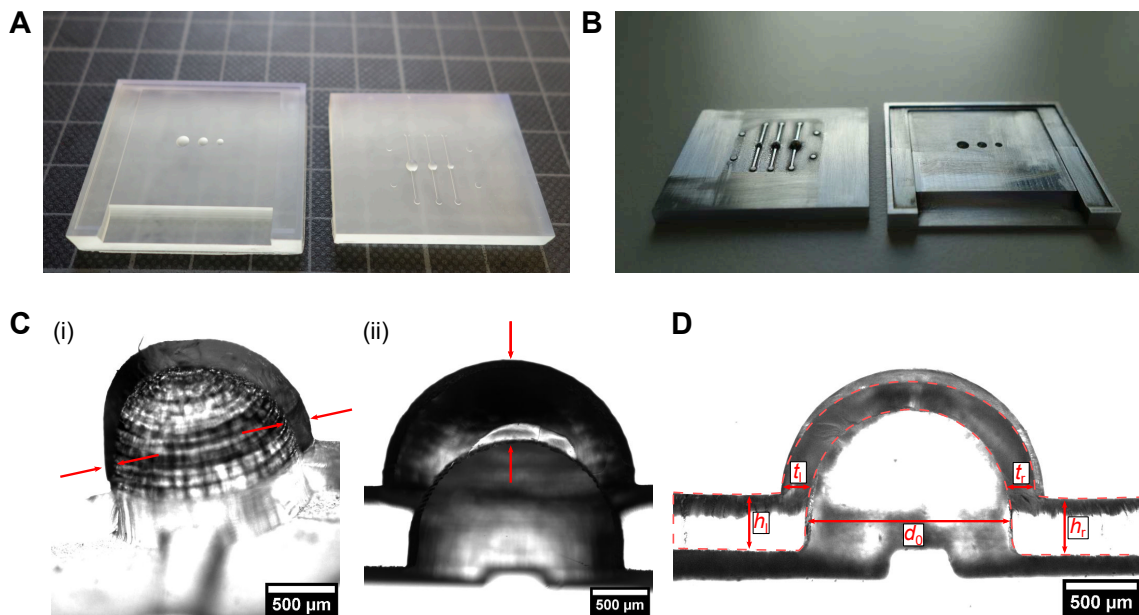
Comparison between utilized molds and PDMS replicas. (A) Picture of SLA-printed molds. (B) Picture of CNC-milled molds. (C) Side cuts of dome layers molded from SLA-printed molds highlighting observed variability. (i) Horizontal misalignment leads to asymmetric side walls, (ii) vertical misalignment to increased thickness. (D) Side cut of a dome layer molded from a CNC-milled master. Key dimensions used for mold characterization are marked in red.
